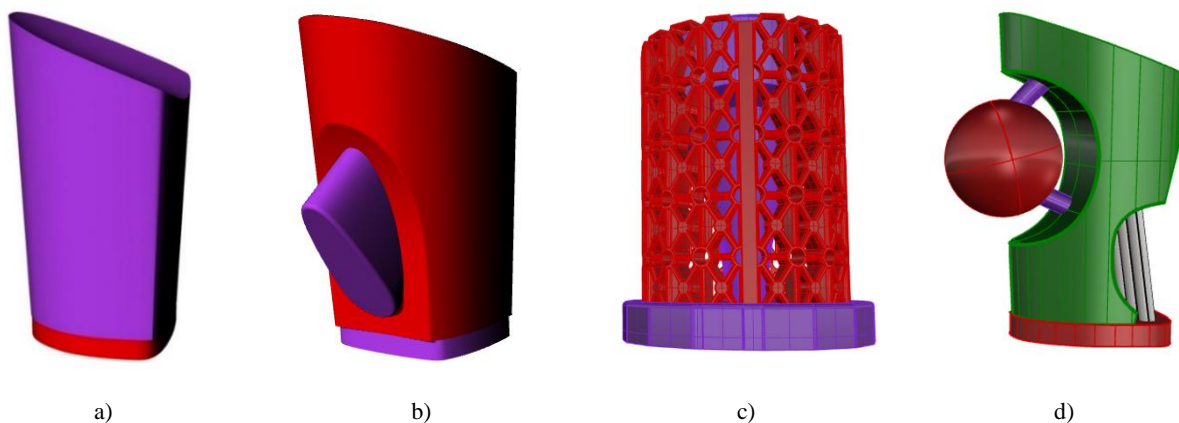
CAD model of heel prototype: a) prototype 1, b) prototype 2, c) prototype 3, d) prototype 4
